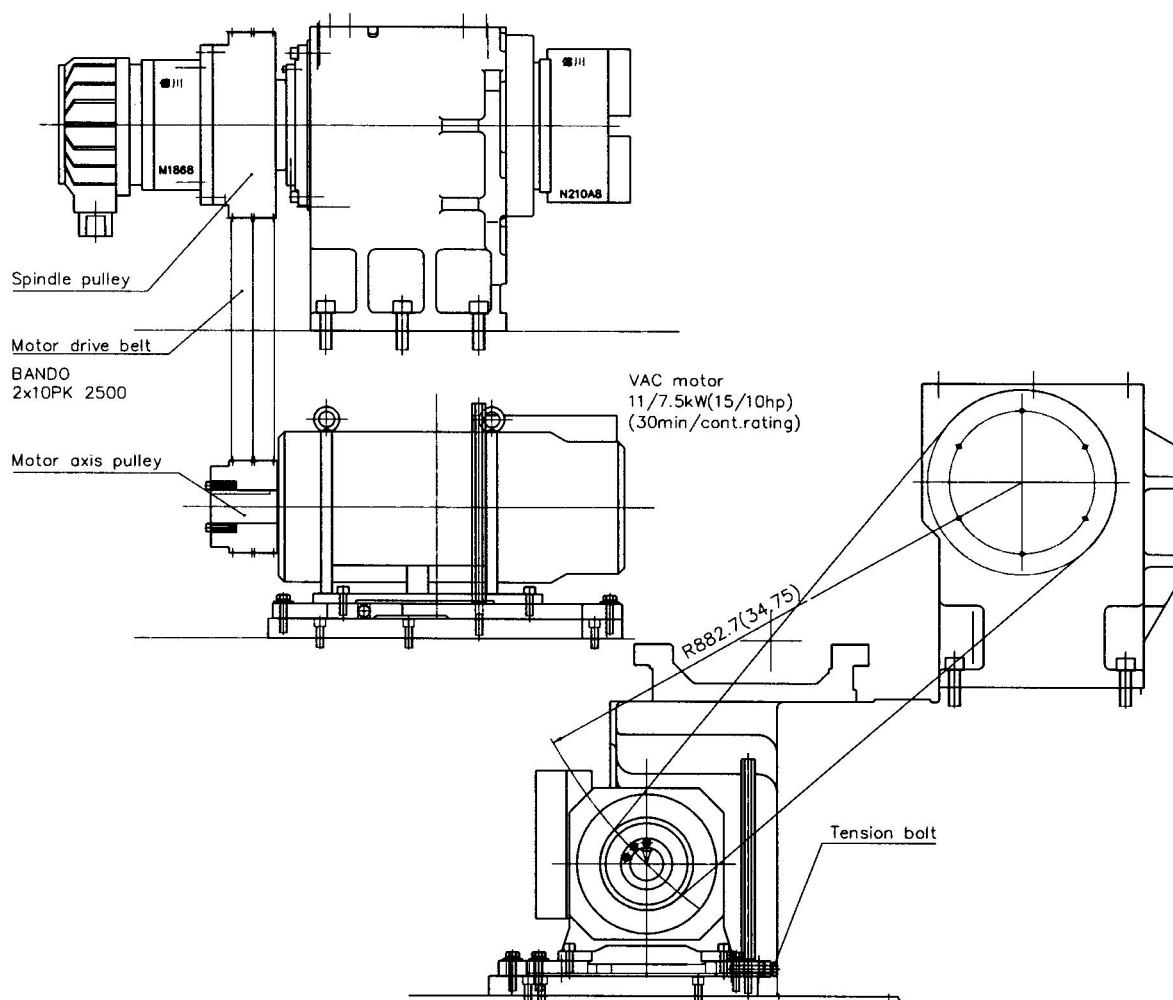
Spindle Drive Belts for 15 / 11 kW
